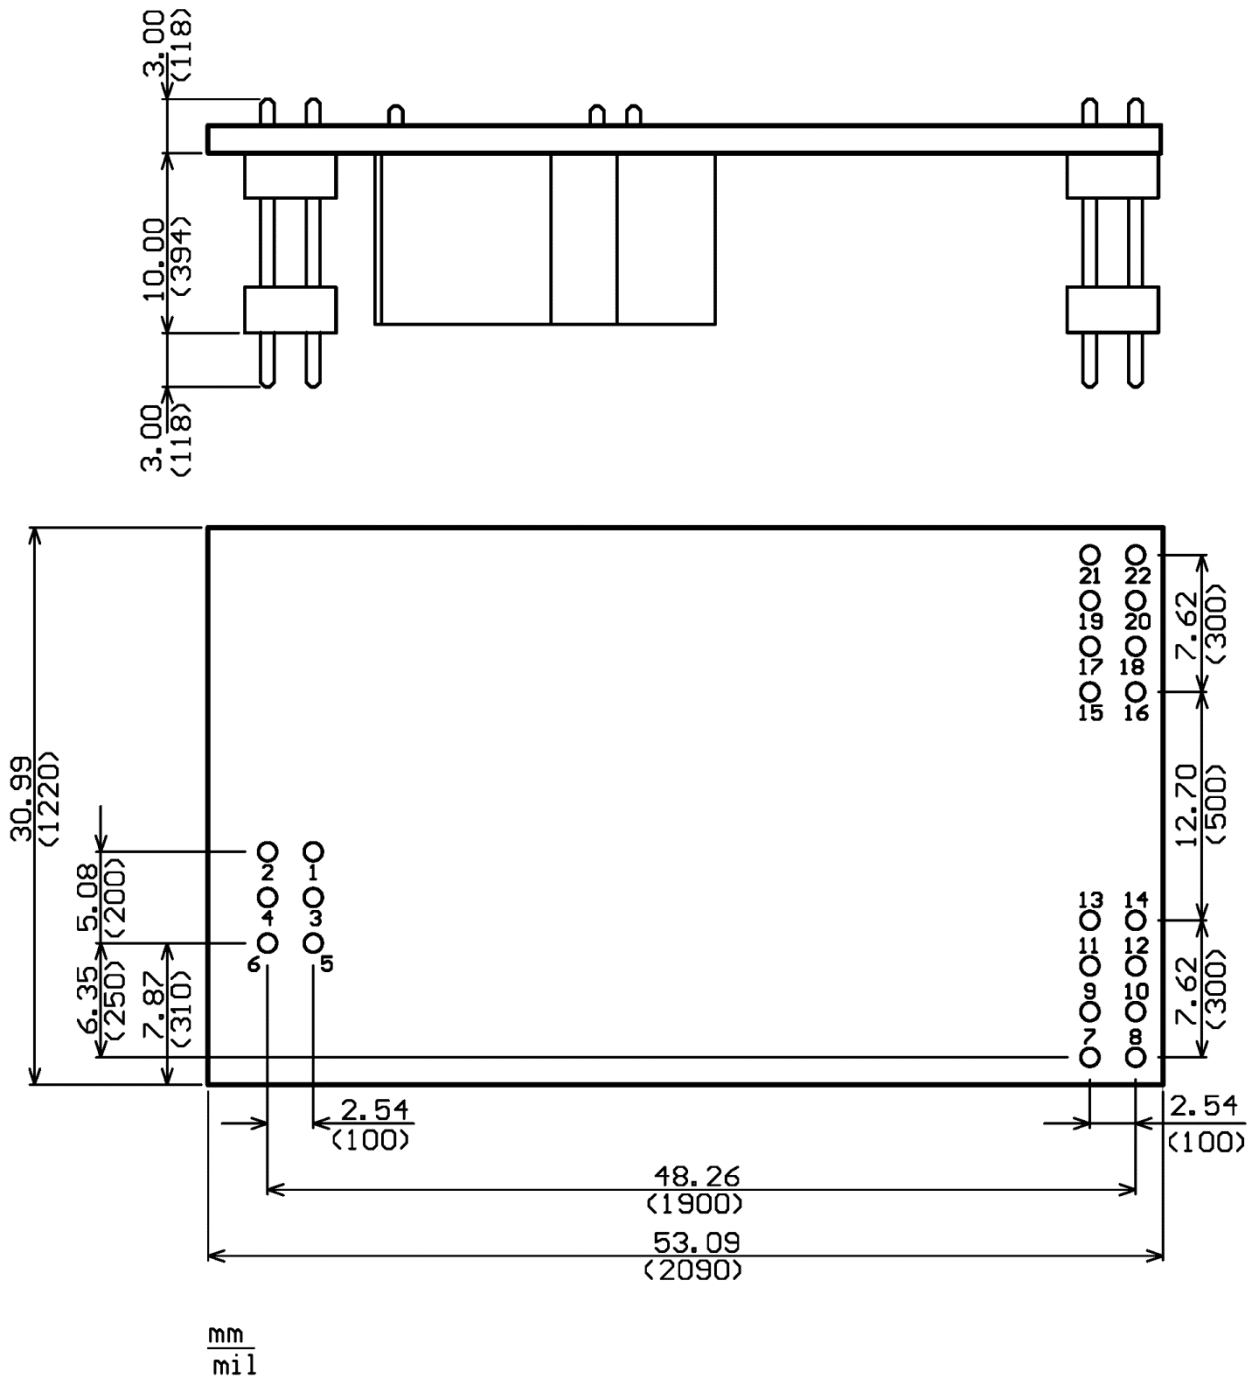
Mechanical drawing of 2SC0115T (side view, top view)
